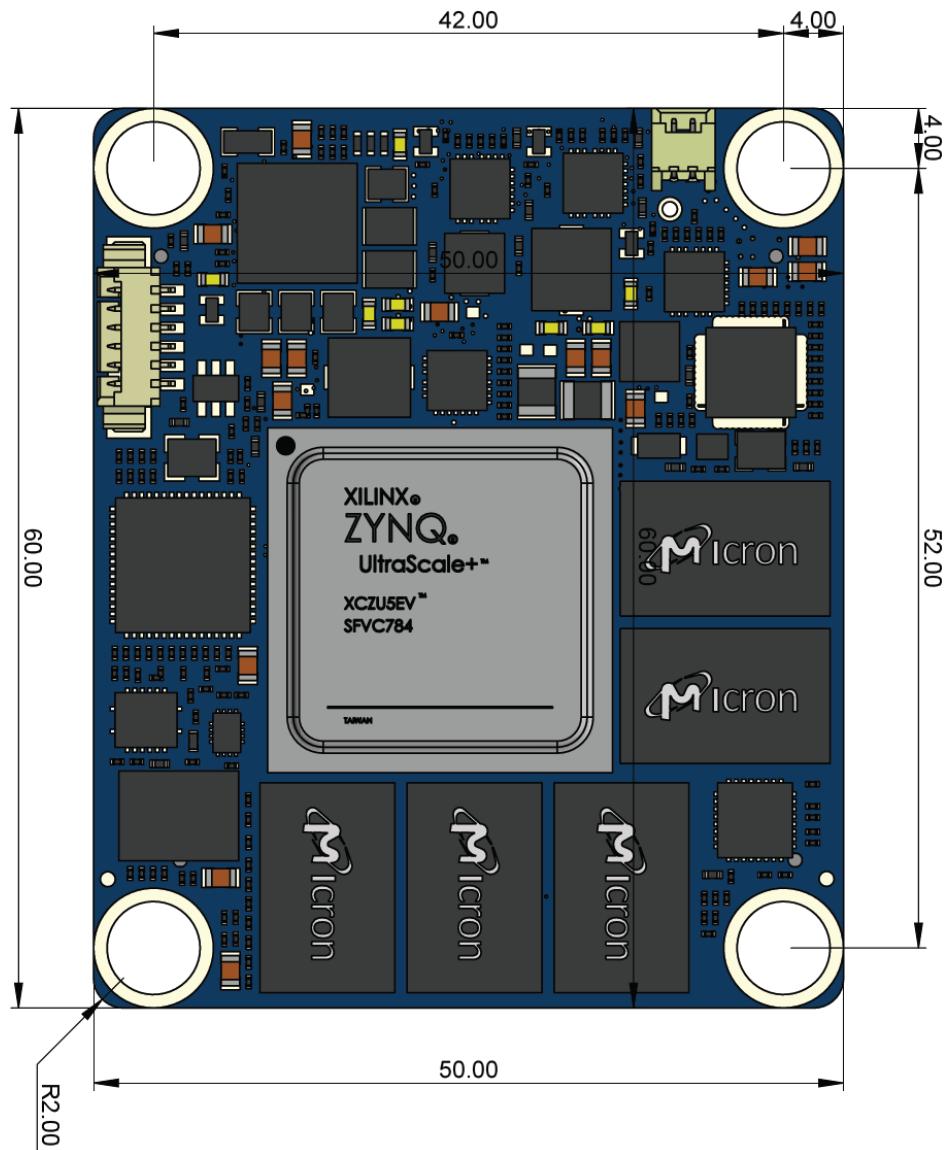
Mechanical dimension of Zynq UltraScale+ MPSoC SOM - Top View
